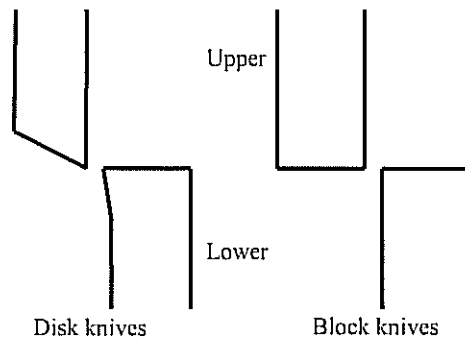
Schematics of shear slitting using disk knives and block knives.
